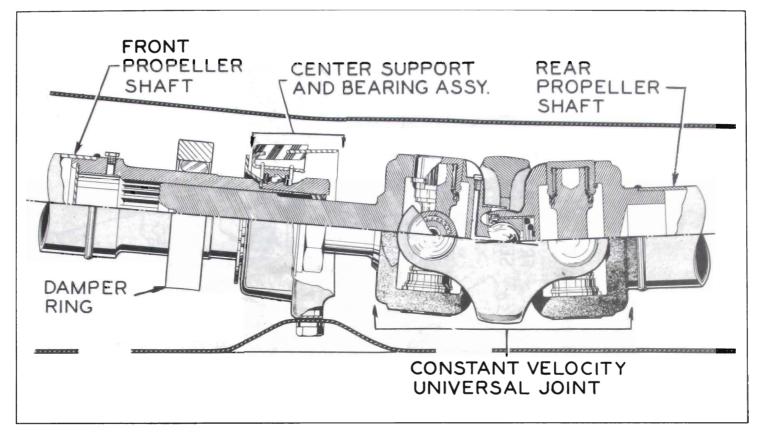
Center Support, Bearing, and Constant Velocity Joint
